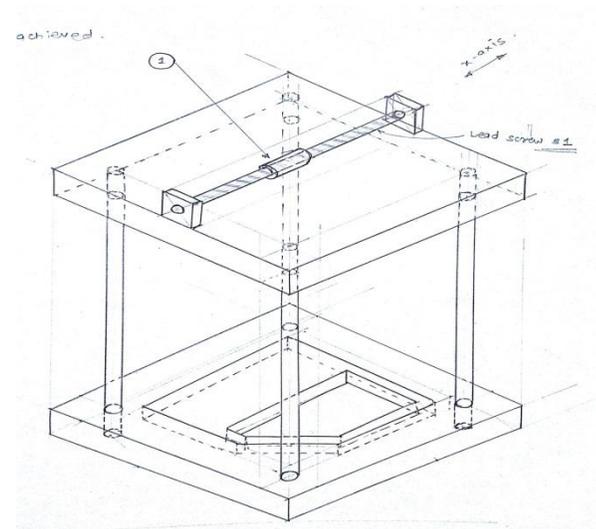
Isometric view of machine assembly (satisfying x-axis motion requirement)
